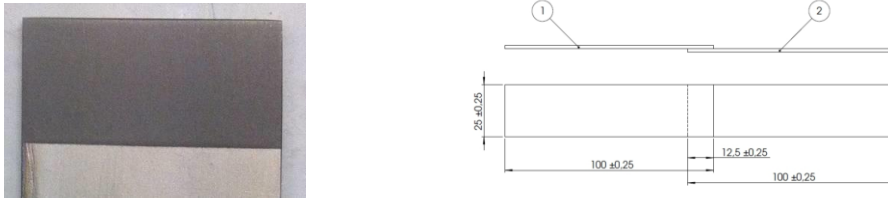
(a) Sandblasted specimen; (b) Specimens configuration
